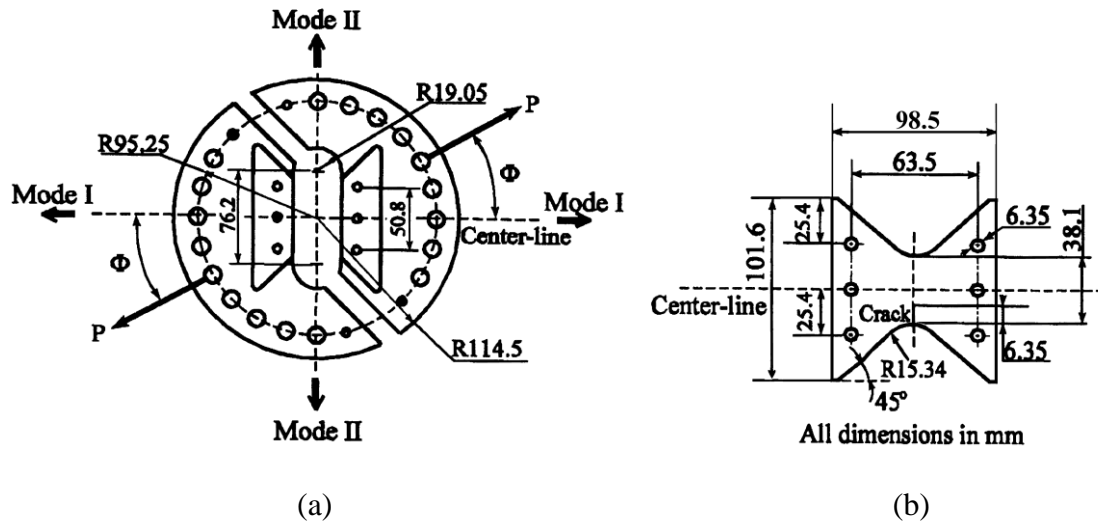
In-plane dimensions of (a) the Arcan test fixture and (b) the test specimen. All dimensions are in mm (Amstutz et al., 1995).
